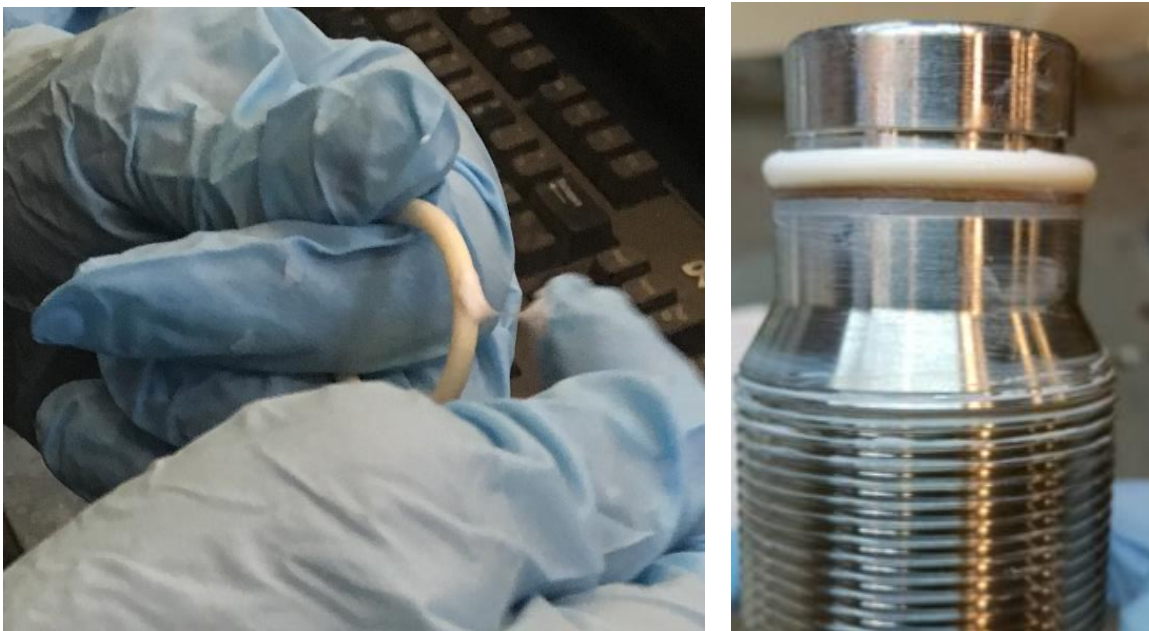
Clean and lubricate the O-ring and install it on the fitting.
